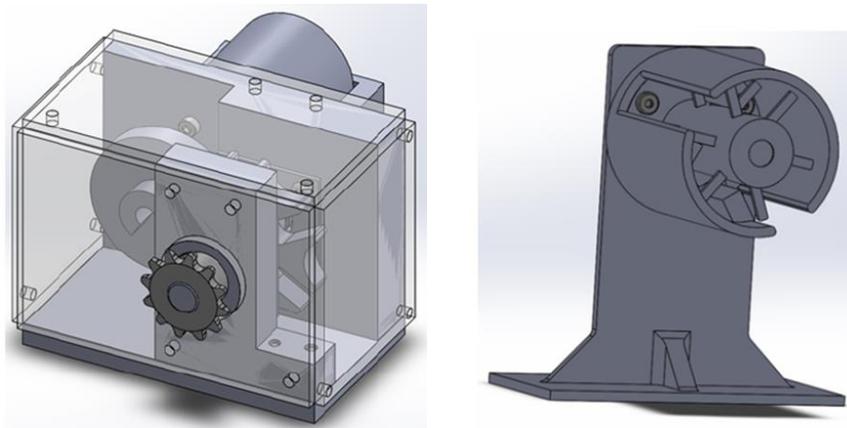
Left: CAD model of assembled Geneva device. Case of driver motor is shown at rear. Gear wheel on front of case is provided to drive application requiring timed intermittent application such as loader mechanism for walking beam conveyer. Right: CAD model of loader mechanism to load parts on walking beam at specified feed rate.
